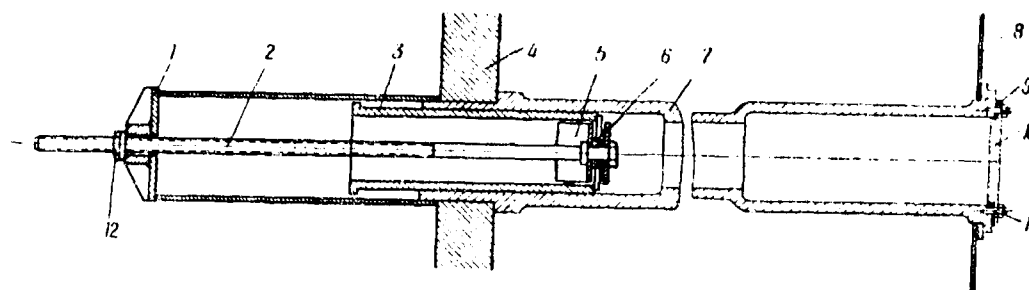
Extrusion of Stern (Rear) Deadwood Bushing with Universal Attachment: 1 - cap; 2 - coupling bolt; 3 - deadwood bushing; 4 - outer sheathing of ship's hull; 5 - sleeve; 6 - spring-type clamps (clamps activated by springs); 7 - stern tube; 8 - bulkhead; 9 - gasket; 10 - metal stopper; 11 - cotter (stud); and 12-grip nut.
